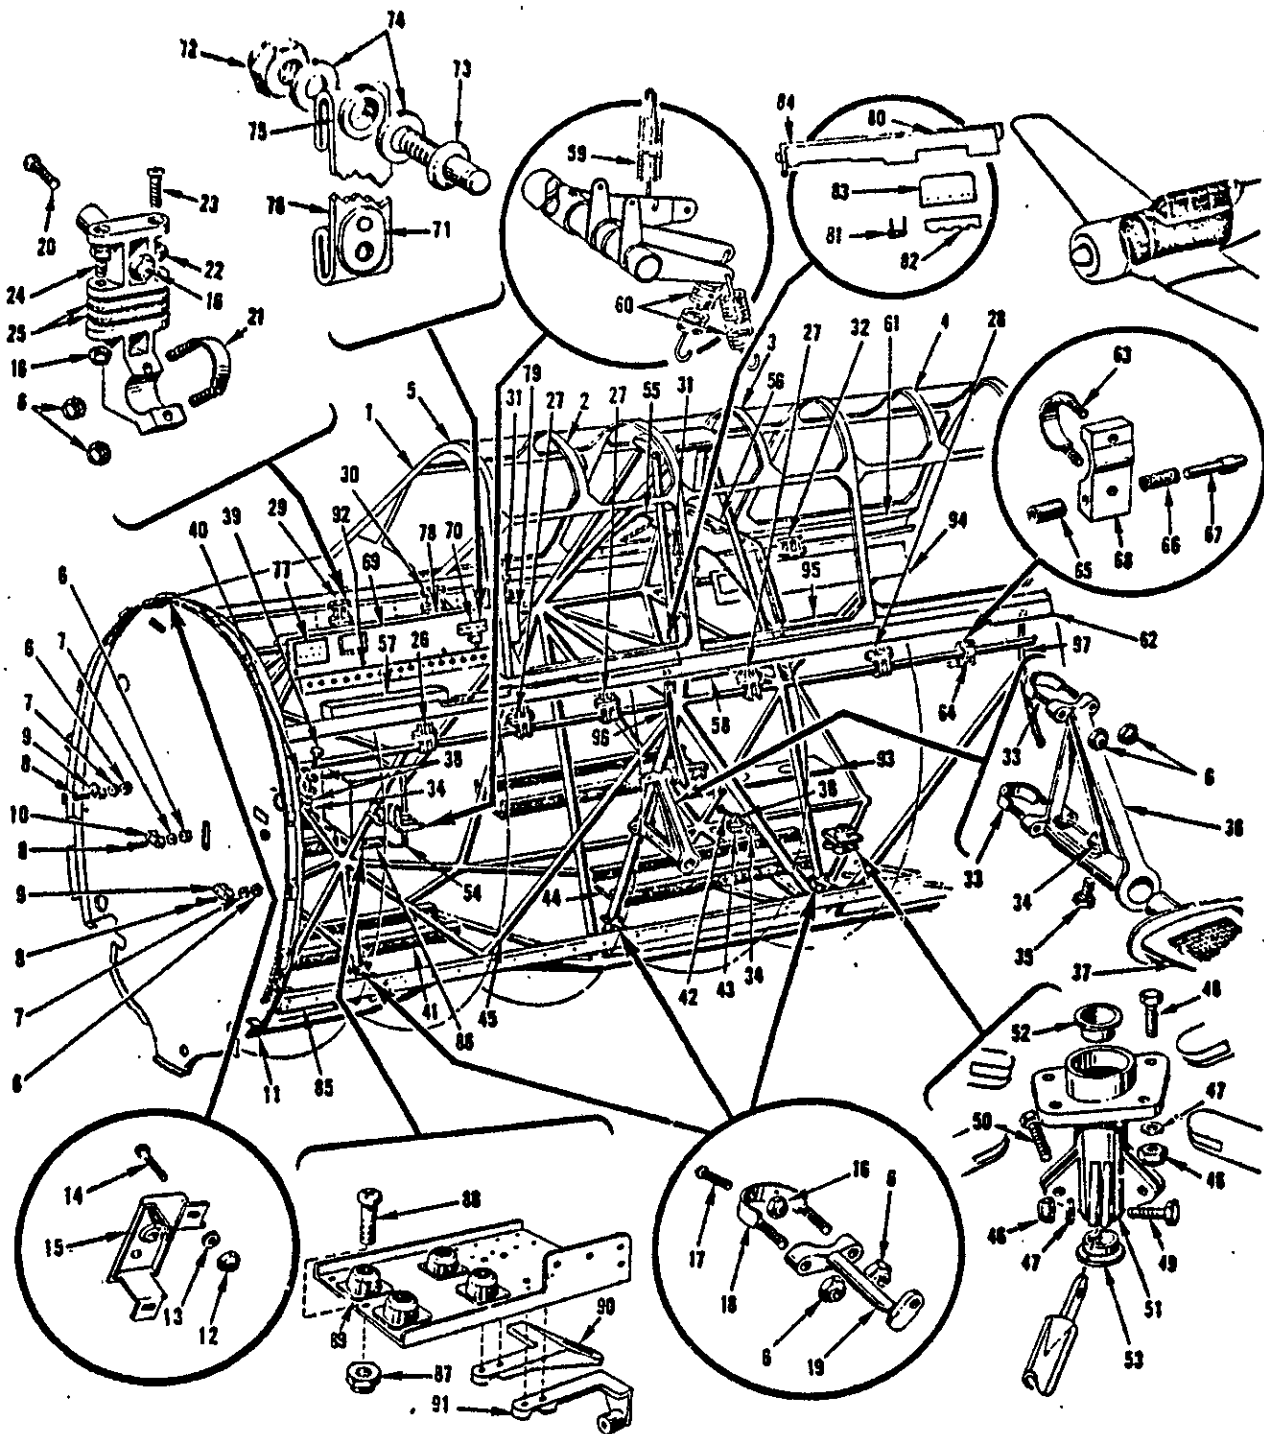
COMPLETE FUSELAGE ASSEMBLY
